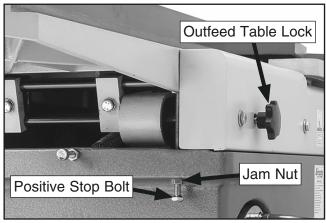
Location of outfeed table lock, positive stop bolt, and jam nut.
